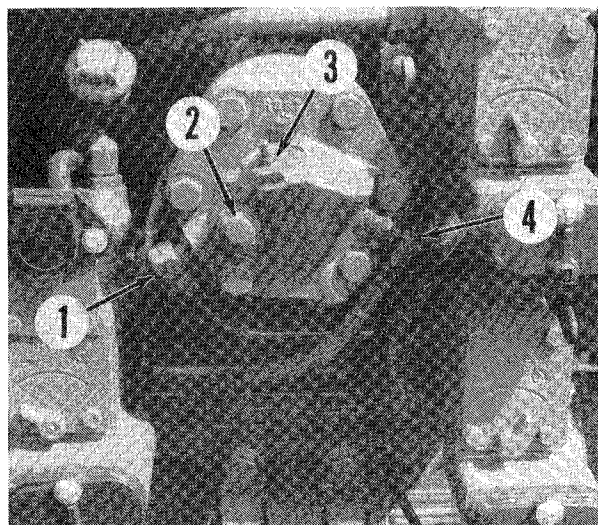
View of rockshaft cylinder end cover used on models equipped with lift assist cylinder. A lowering valve is also located in the cover on some models.
